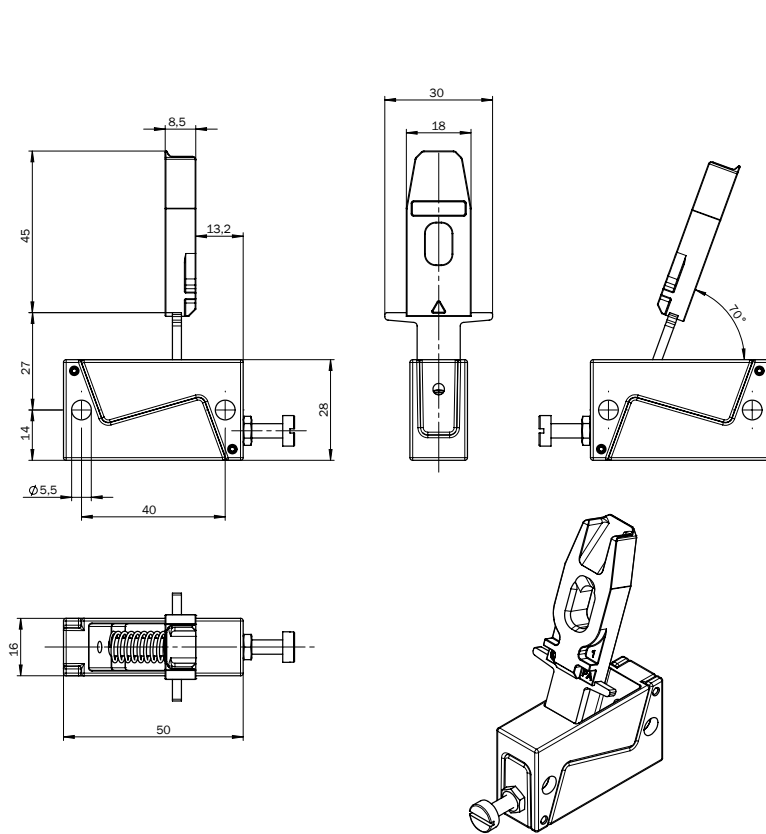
Dimensional drawing of TR110-XAFT hinged actuator (mm)
